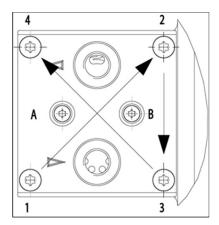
Tightening cap head screws (1-2-3-4) and head plate screws (A-B)
